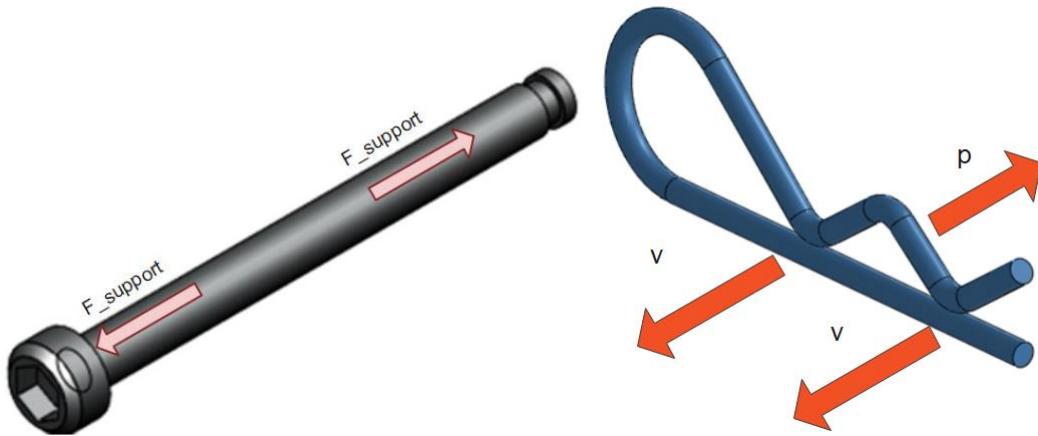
FBD schematics of pad retaining/guiding pin and clip.
